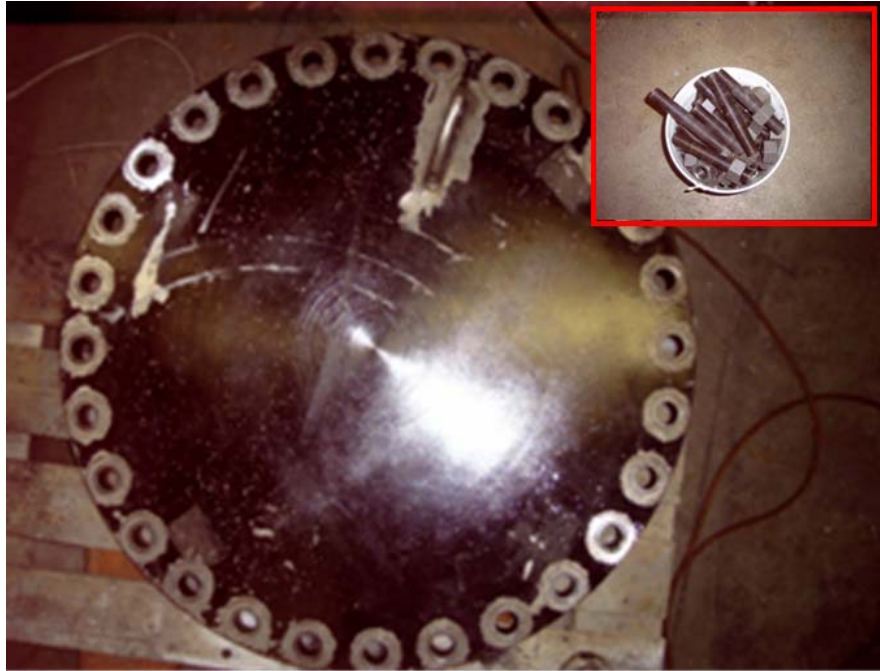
New end plate for the pressure vessel with 1-1/4 inch fastening bolts-nuts.
